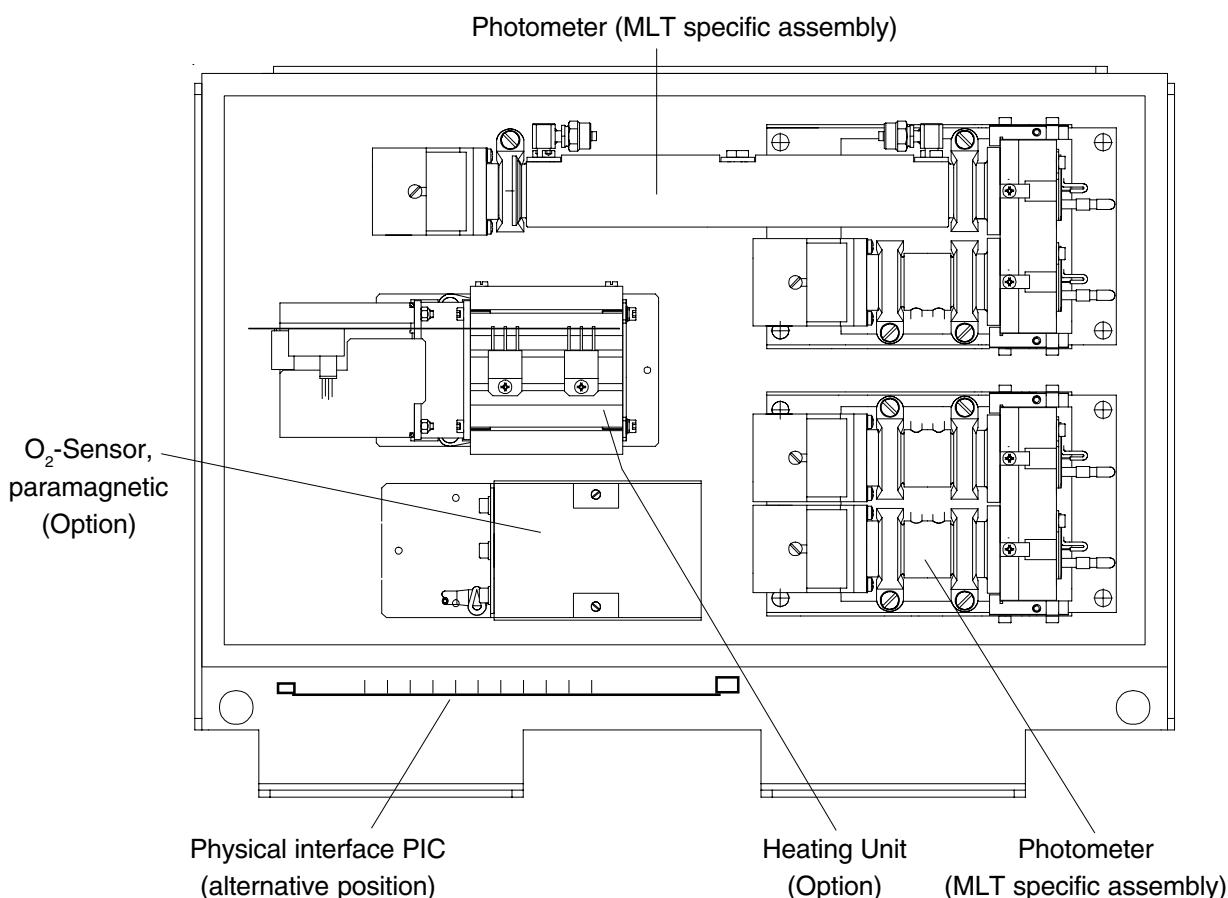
MLT 2, Photometer sliding carriage, Top view
